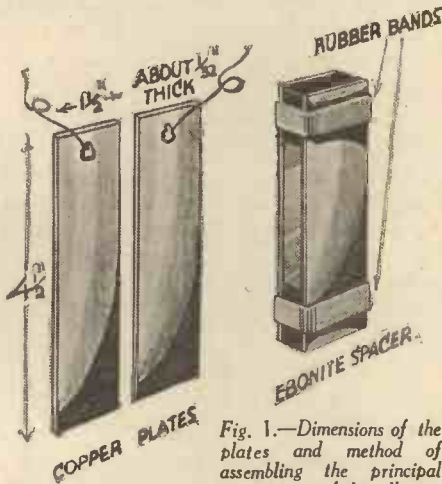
Dimensions of the plates and method of assembling the principal parts of the cell.
